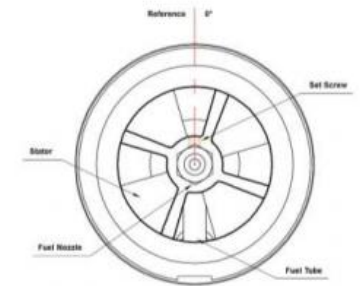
S-29 Stator Axial Position (looking into draft tube)
